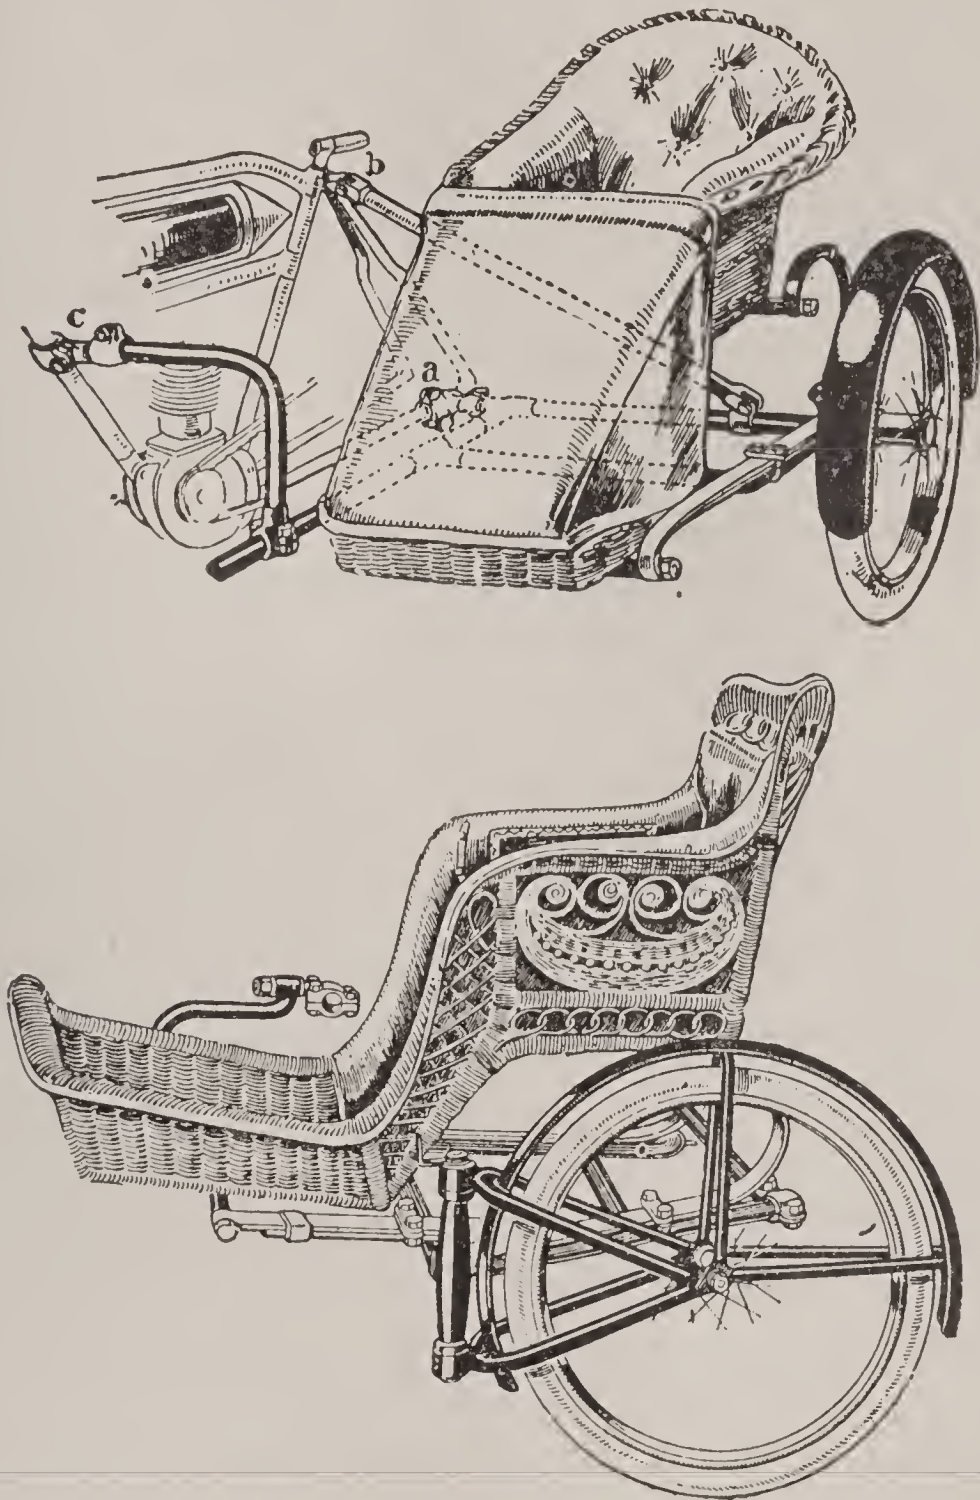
Examples of Rigid and Castor Wheel Side Cars.
